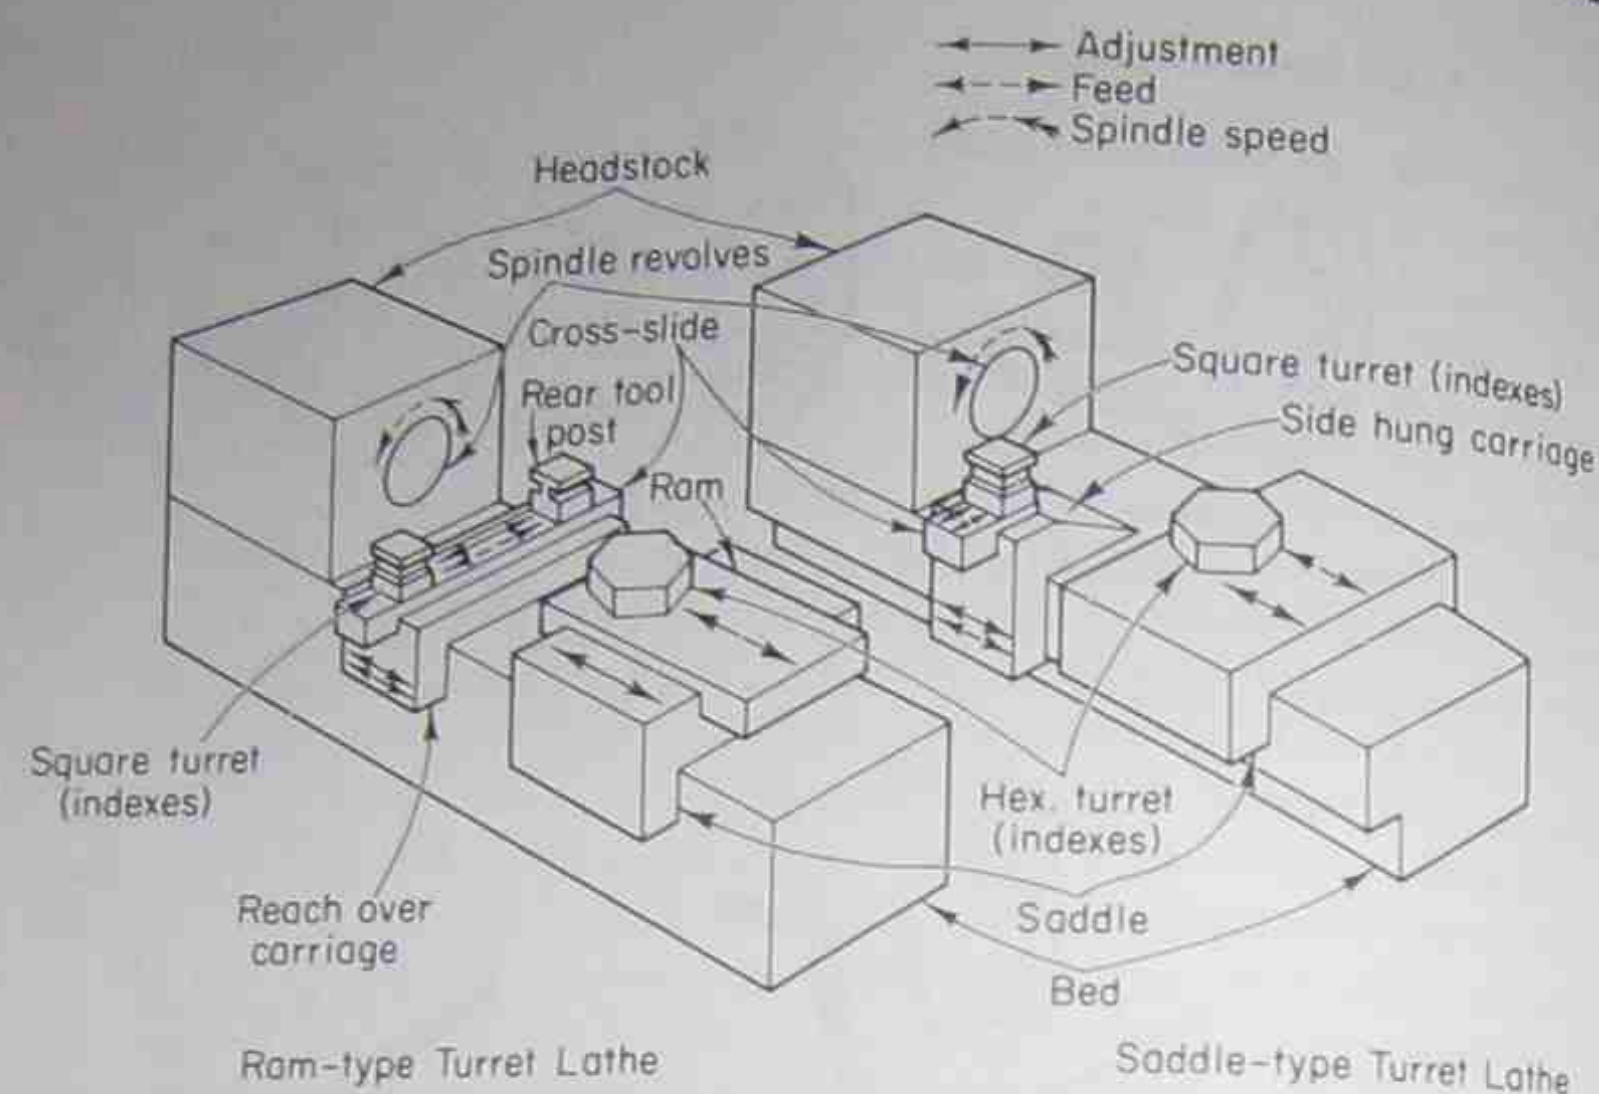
Schematic of a horizontal turret lathe showing major components and movements.
